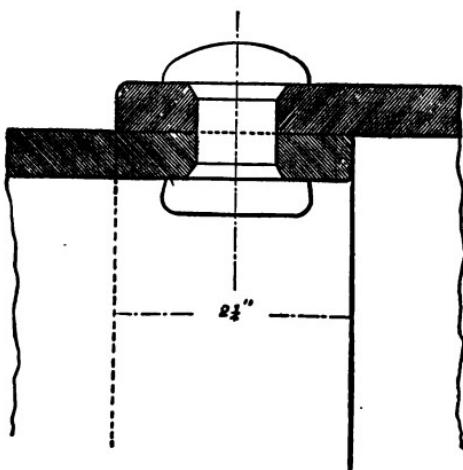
Single-riveted Lap-joint of Boiler-plates.
